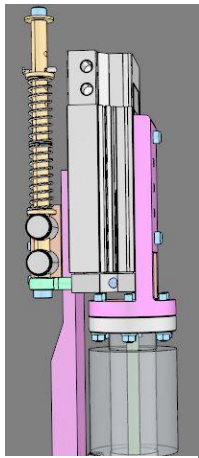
3D CAD model of the Cathode Viewing Mirror assembly.
